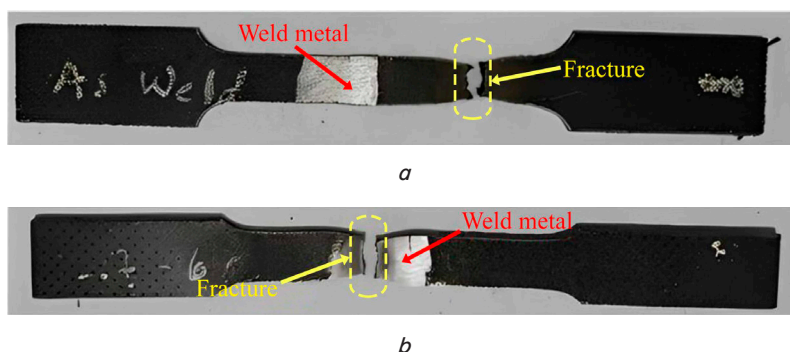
Tensile test fracture of: a – As-welded; b – HS27-6C
